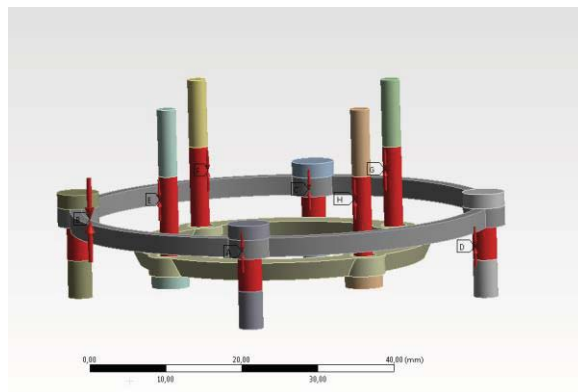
Unthreaded part of the bolts (indicated by the red color)
